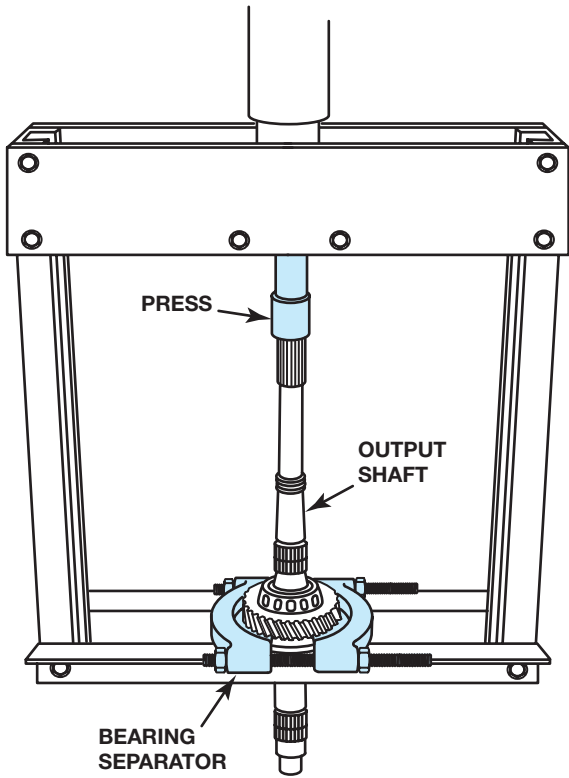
After the snap ring has been removed, the mainshaft will be pressed out of the gear and bearing. The gear will support the bearing by its inner race.
